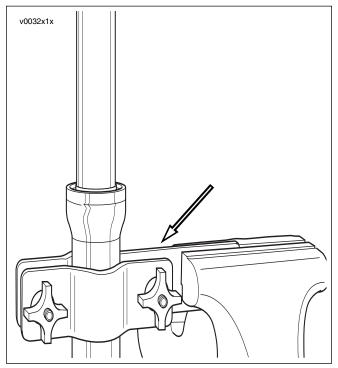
Fork Tube Holder (HD-41177) (mounted vertically to slider)
